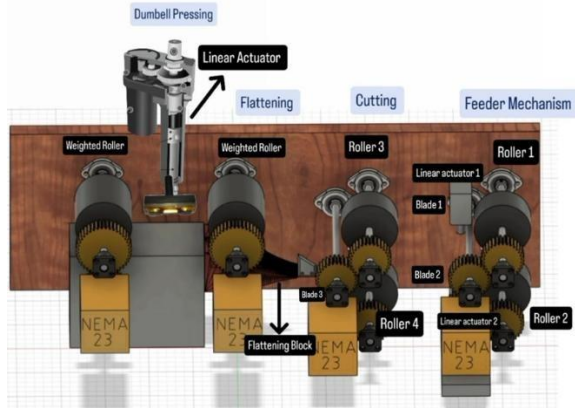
Fusion 360 CAD Top-View — Feeder Mechanism (right), Cutting Module, Flattening Block, and Dumbbell Press (left)
